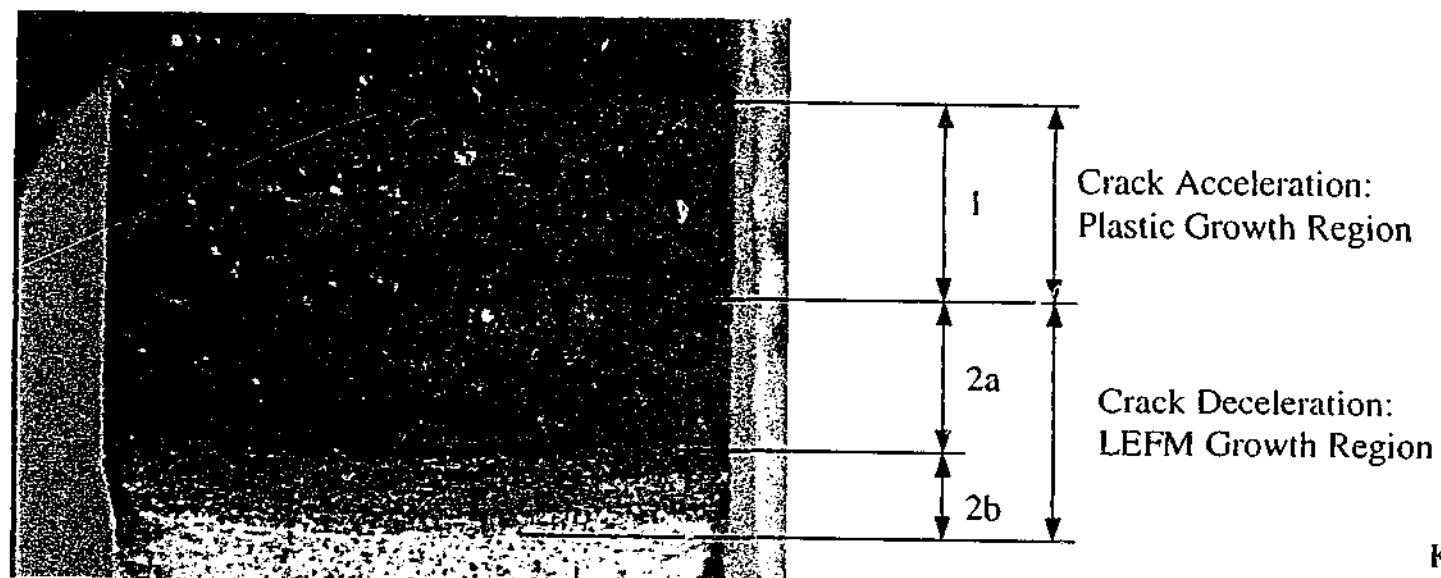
Fracture surface, specimen #2, notch position 1.
